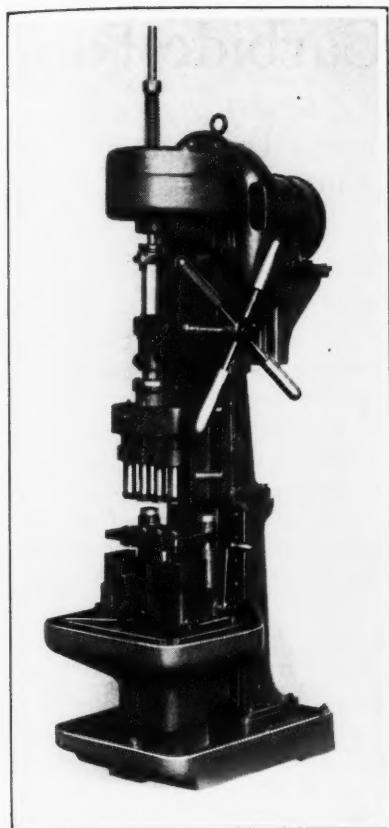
Drilling Machine Used for Countersinking the Spark-plug Holes of Austin Cylinder Heads
